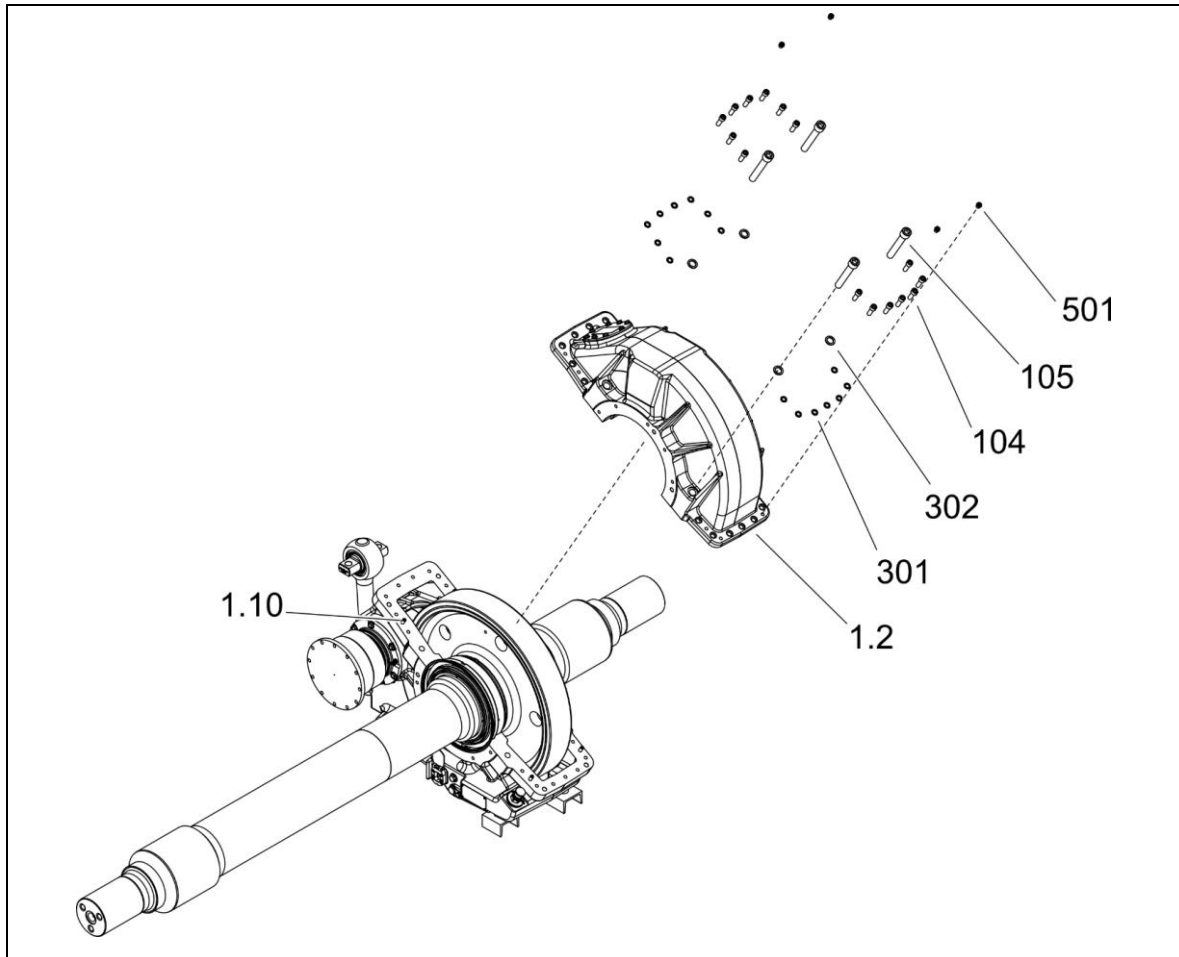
Demounting the wheelset shaft from the Traction Gearbox – part 2
